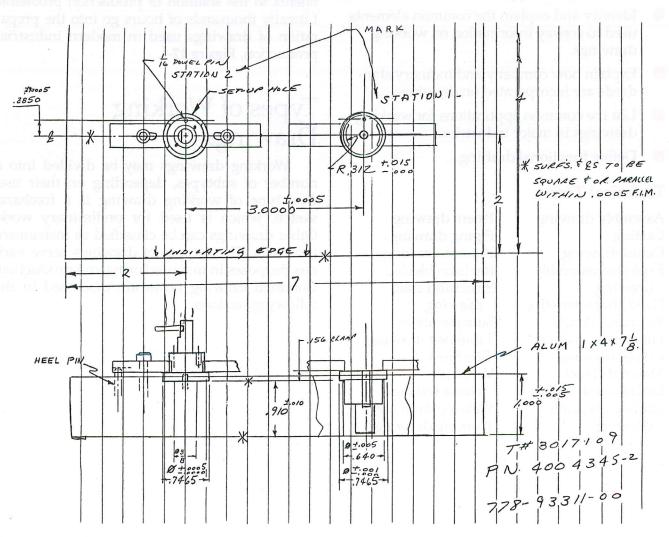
A freehand sketch used as a working drawing in the production of a tooling fixture. (Sperry Flight Systems Div.)
